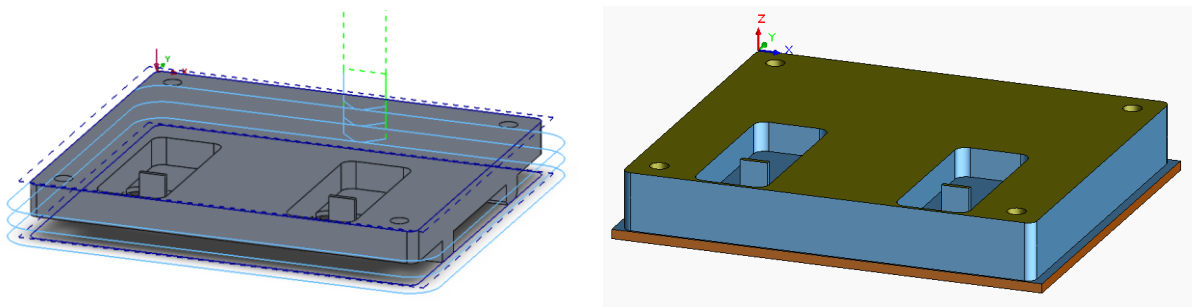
Machining sidewalls (a) Tool path (b) Machined result
